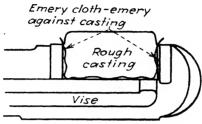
,-Using abrasive cloth to aid in the clamping of rough castings or forgings.
